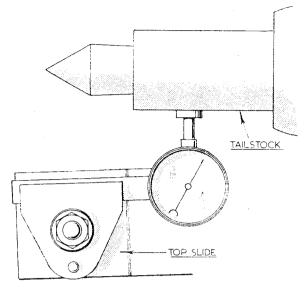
Using the test indicator for making fine adjustments of the top-slide setting
